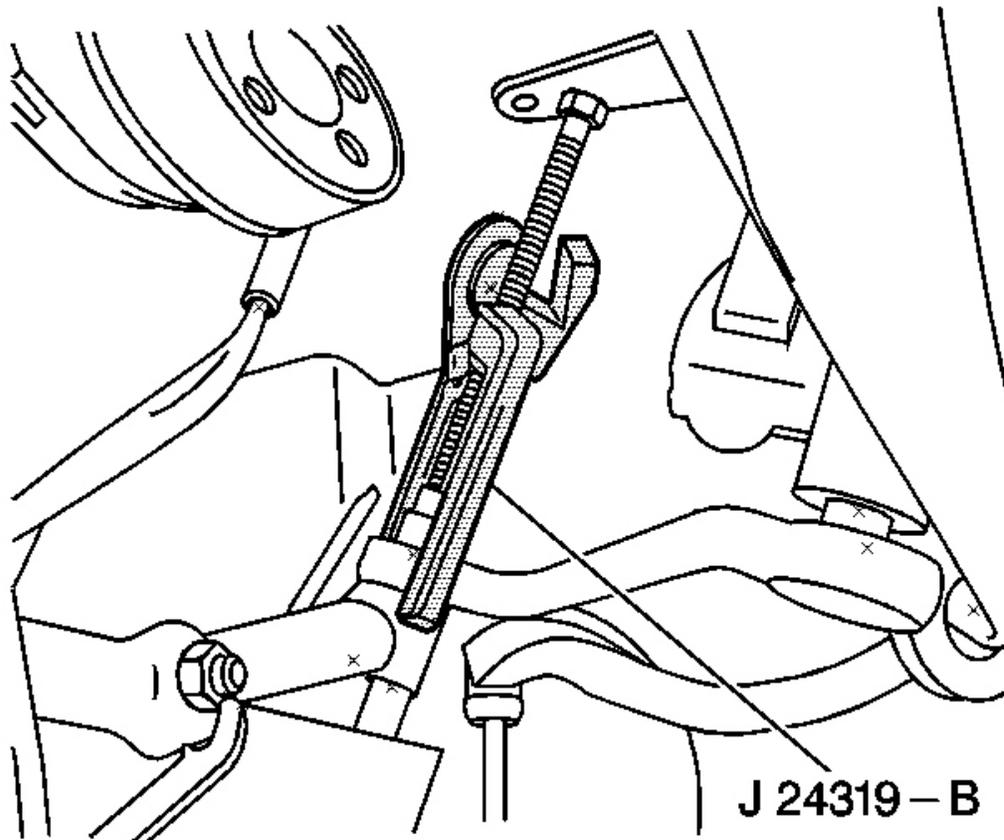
Using J 24319-B To Remove Relay Rod From Pitman Arm Ball Stud
